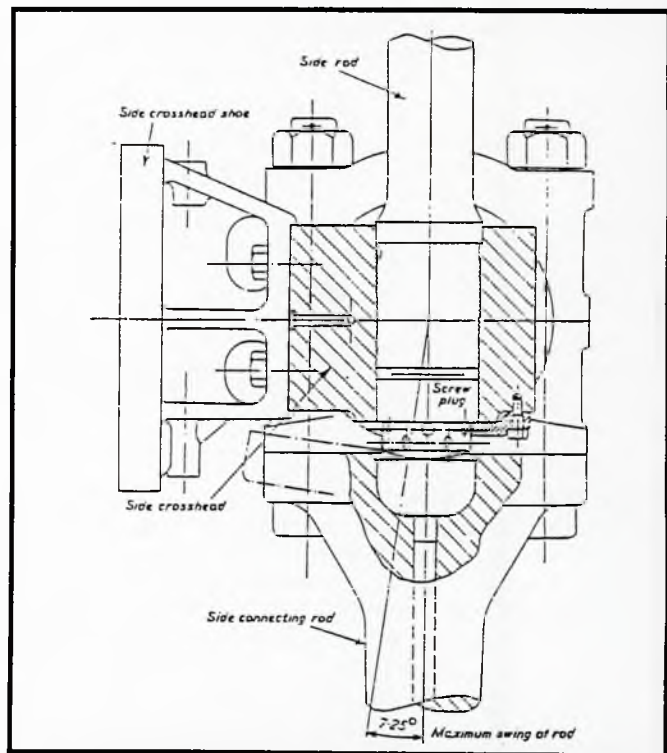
Crosshead designs in P-engines and early J-engines; side rod and crosshead assembly
